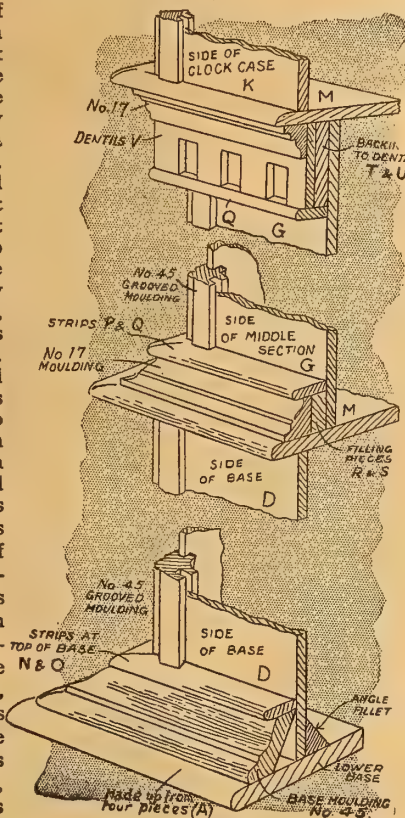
Details of the different parts with moulding, base, overlays, etc.
